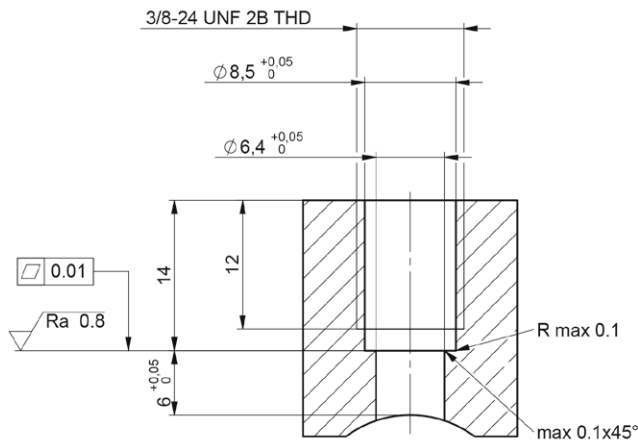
Mounting bore dimensions for tangential/flush mounting of Type 6239ABA (3/8-24 UNF thread)
